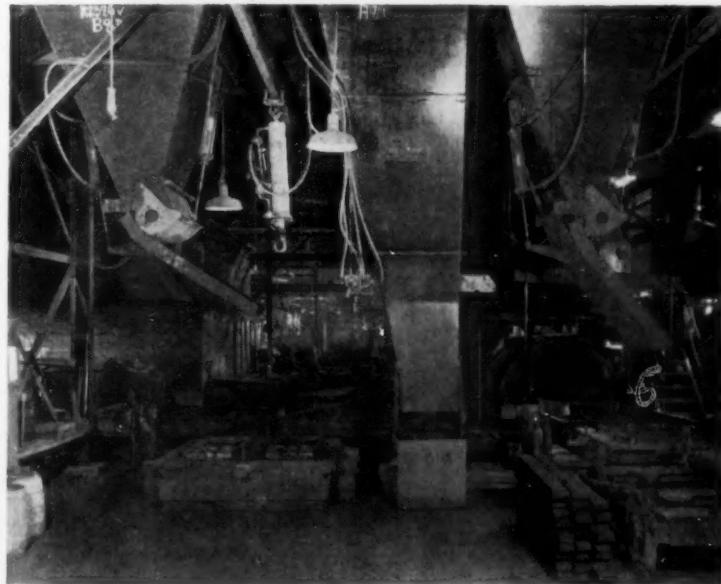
WELDED SAND HOPPERS OVER MOULDING MACHINES FOR LARGE WORK. THE HOPPERS ARE WELDED TO AVOID PROJECTIONS, SUCH AS RIVETS, ON THE INTERIOR OF THE HOPPERS.
